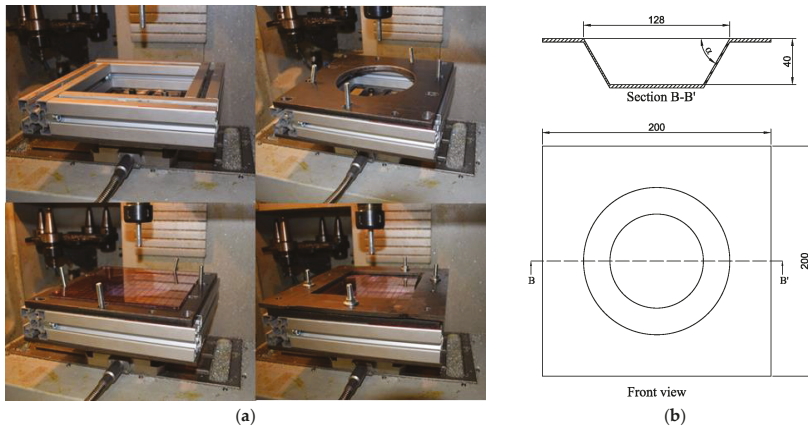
Setup for SPIF: (a) CNC machine with fixing system; (b) Shape of processed sheet.
